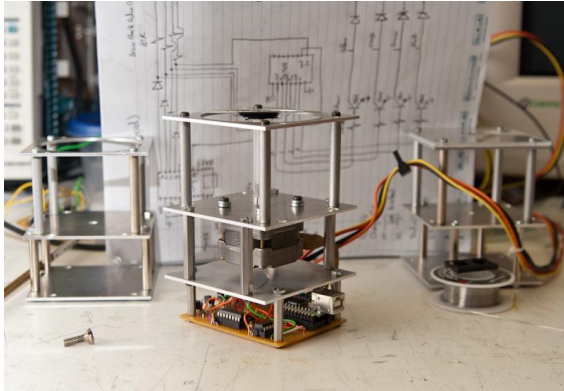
Side view showing the various decks while three gauges (heading indicator in front) are under assembly.
